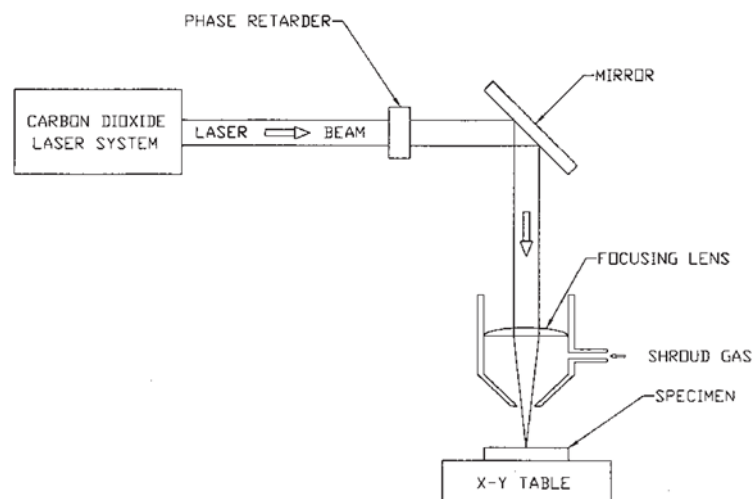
Schematic of Laser Welding Process [27].
